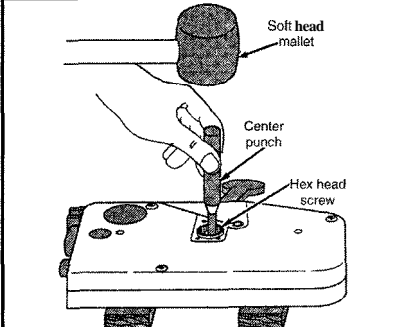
Once the control handle Allen screw is loosened, dislodge the handle splines as shown
